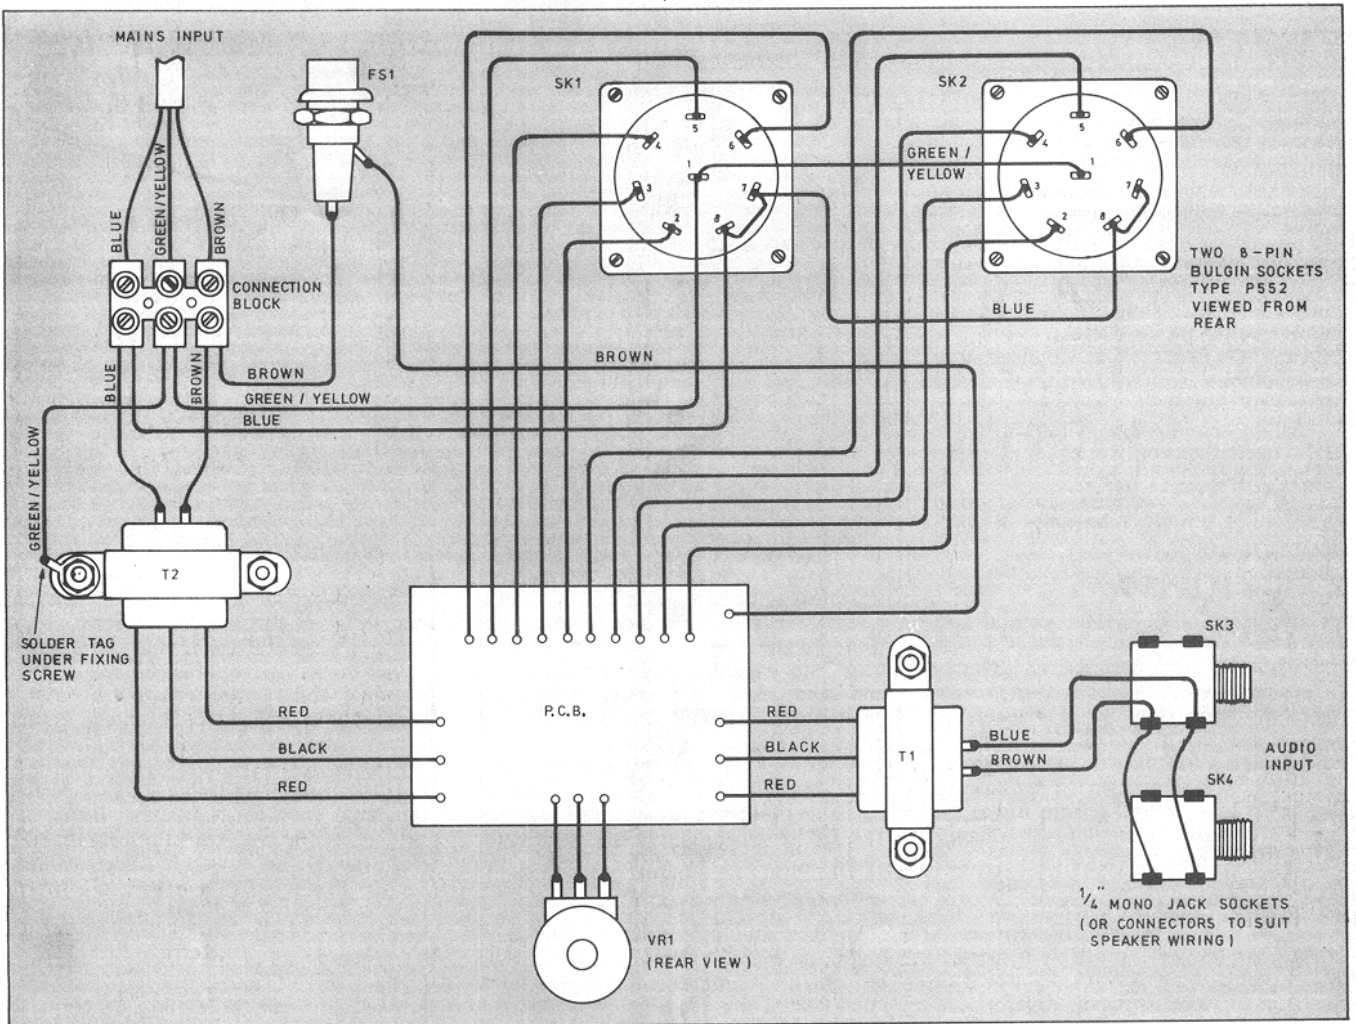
Interwiring details between the p.c.b. and off-board components.
